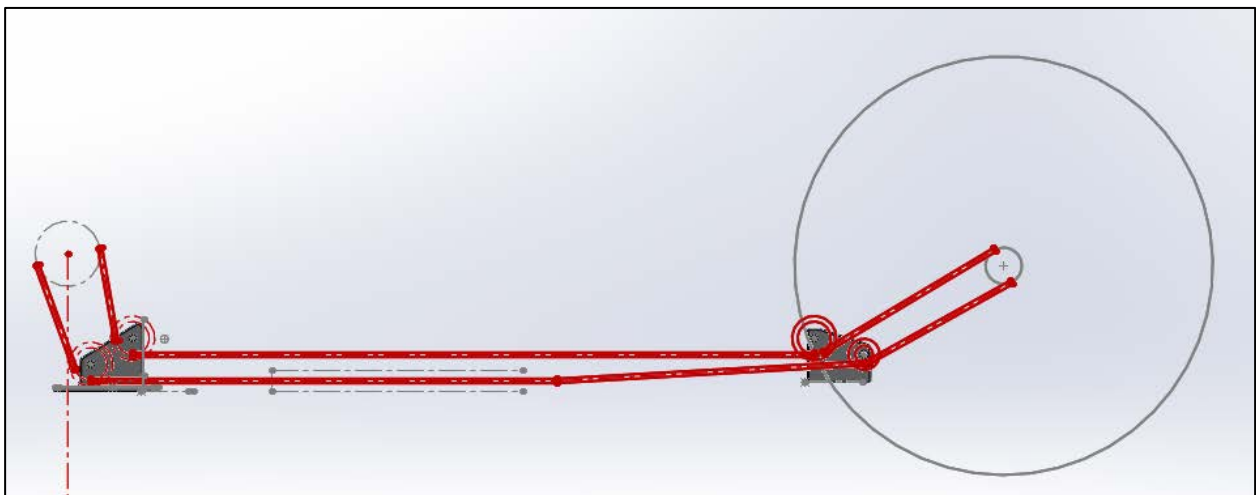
Redesigned drivetrain layout, with rear chain routing shown in red.
